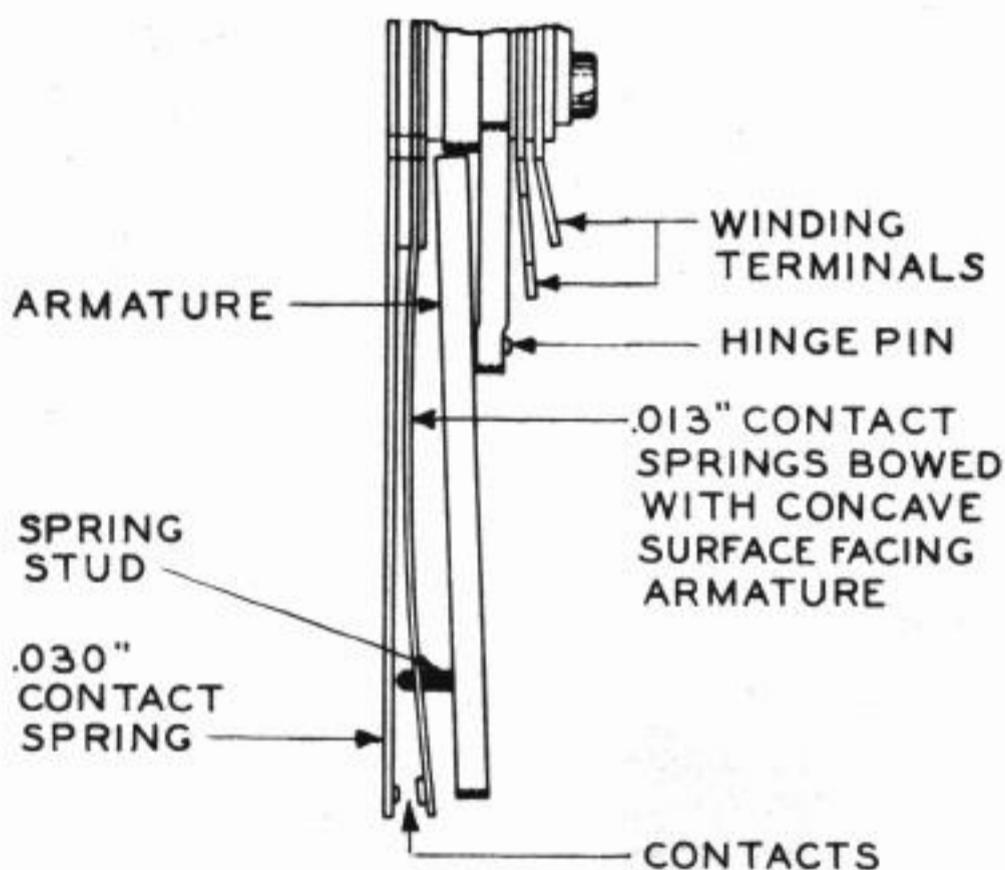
POSITION OF BOWED SPRING BEFORE FINAL TENSION ADJUSTMENT
